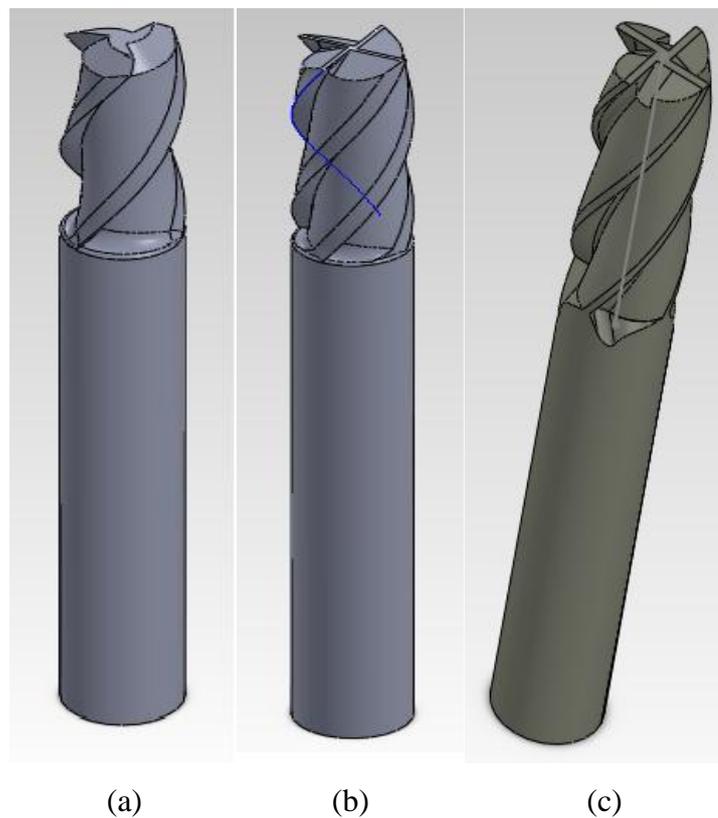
(a) End Mill 3 flute, (b) End Mill 4 flute, (c) End Mill 4 flute Variable Helix
